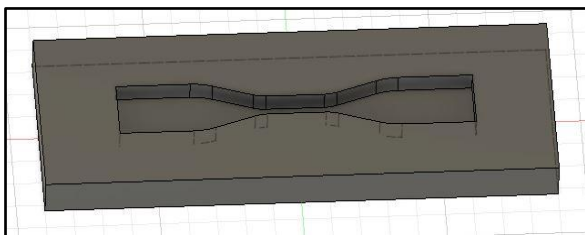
Dimensions of the die as per ASTM standards (All dimensions are in mm)
